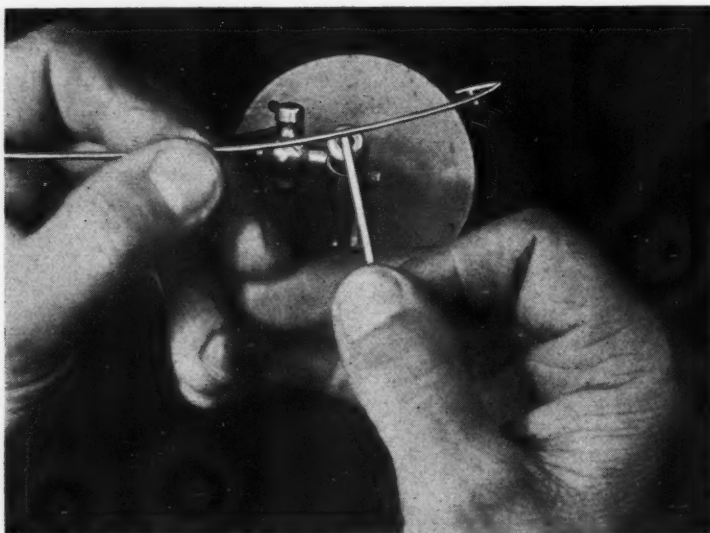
Soldering the half-round wire to the 0.038 inch wire on the opposite side of the body wire.
